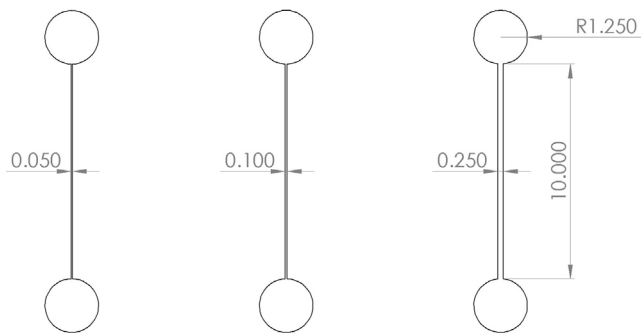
A schematic of the channel dimensions that were used to evaluate the five fabrication strategies. All dimensions are in millimeters. These three channels were fabricated at thicknesses of both 10 and 50 μm .
